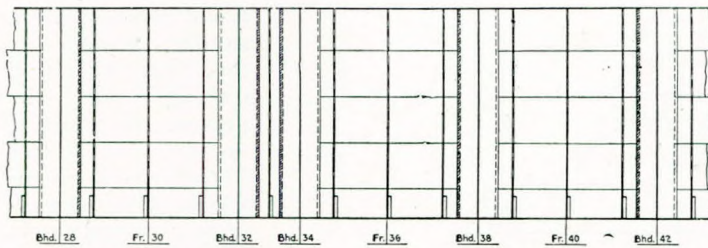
Longitudinal bulkhead. Shaded lines indicate field welds.
